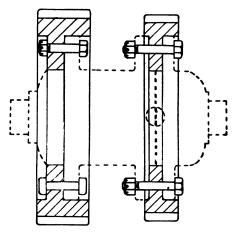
Spur gear mounting of type joined by rivets or bolts
